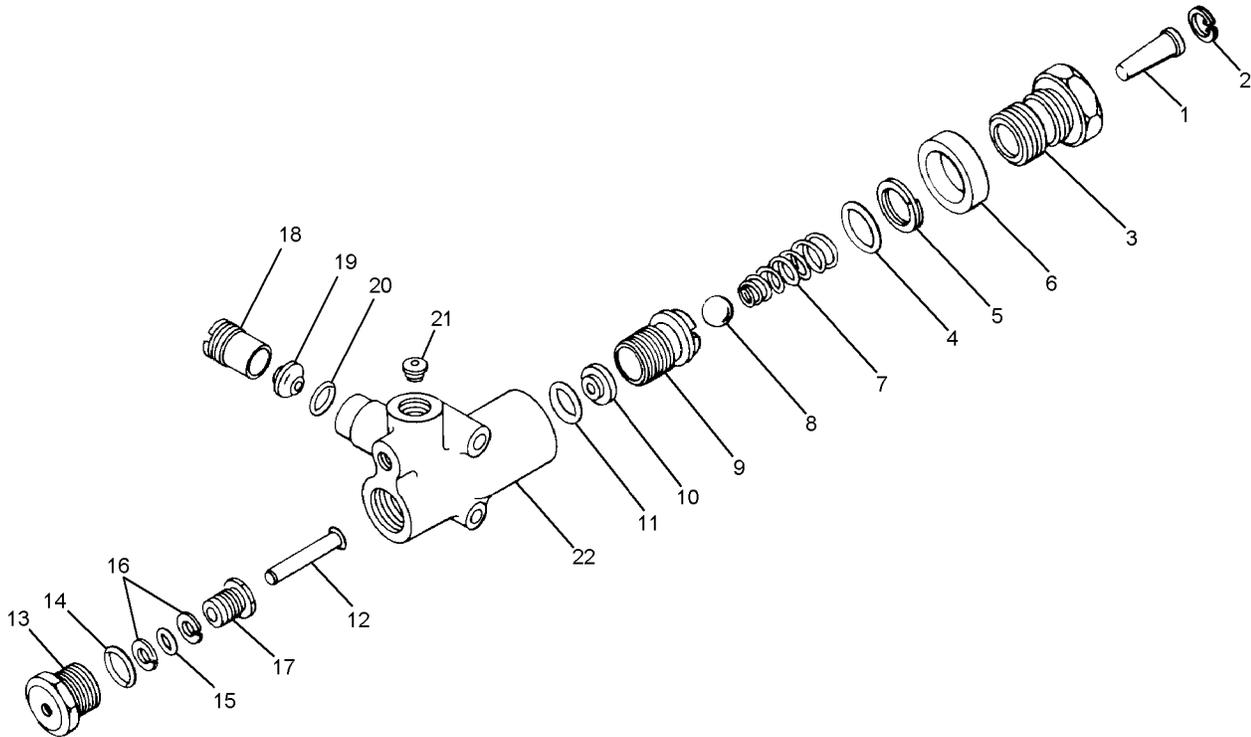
Diluter Plate Control Housing and Check Valve Assembly
